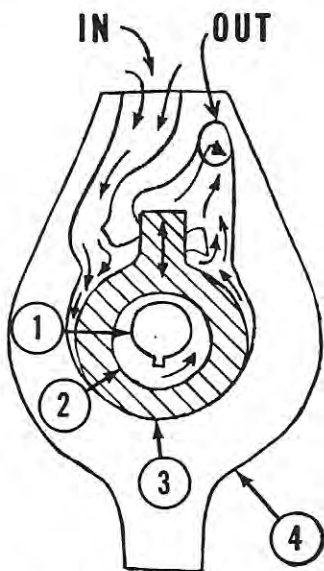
Schematic view of rubber rotor type water pump showing method of operation. Rotor (3) oscillates in housing (4) due to shape of cam (2) on propeller shaft (1).
